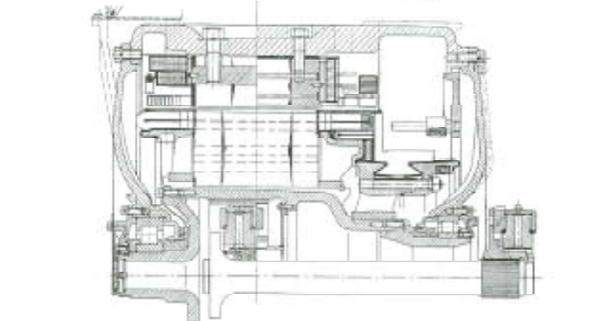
Electric locomotive SKODA with joint shaft inside the hollow rotor and a detail section
